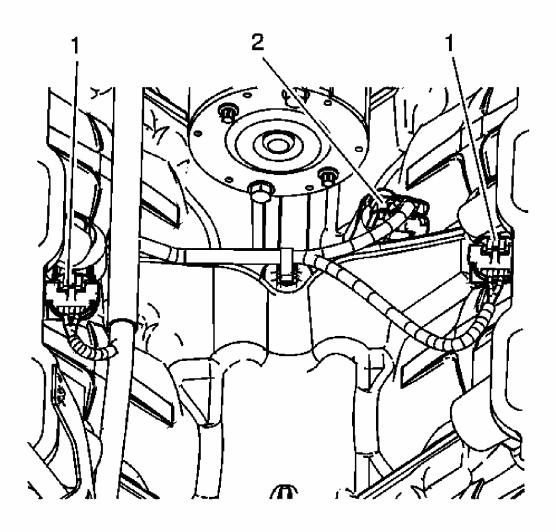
View Of CKP & KS Sensor Wiring Harness Courtesy of GENERAL MOTORS CORP.
